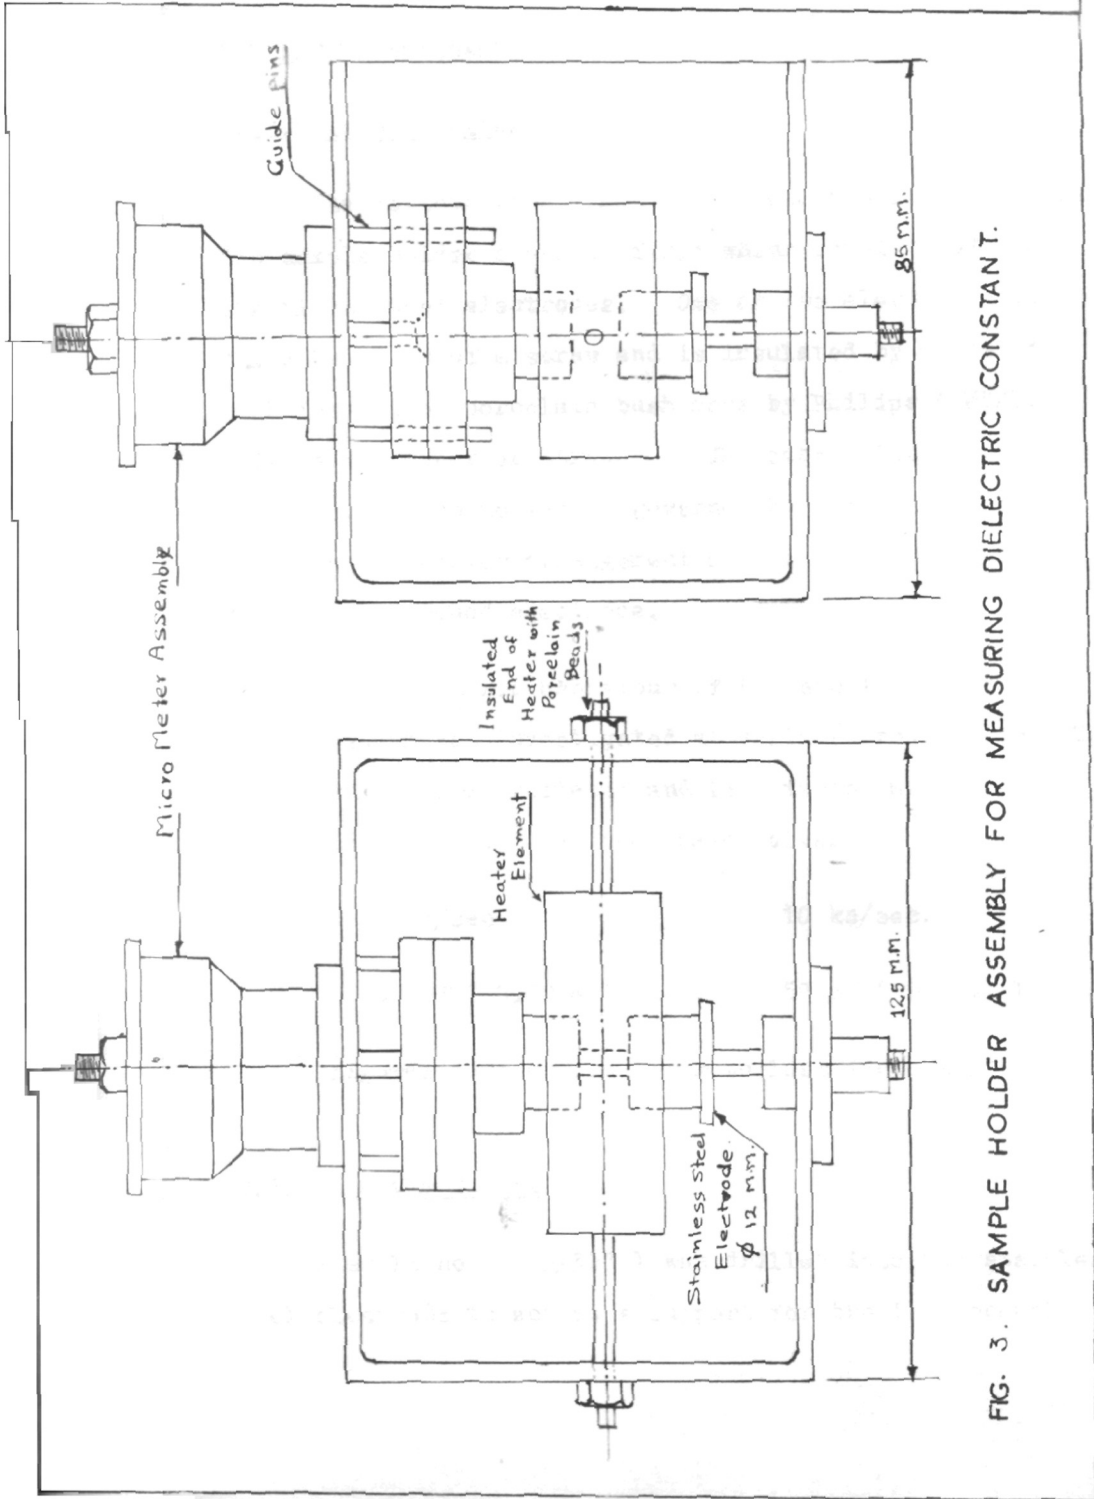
SAMPLE HOLDER ASSEMBLY FOR MEASURING DIELECTRIC CONSTANT.
